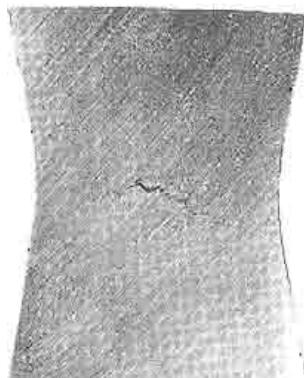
Section of a tensile test specimen stopped just prior to failure, showing a crack already started in the necked region. (Courtesy of E. R. Parker.)
